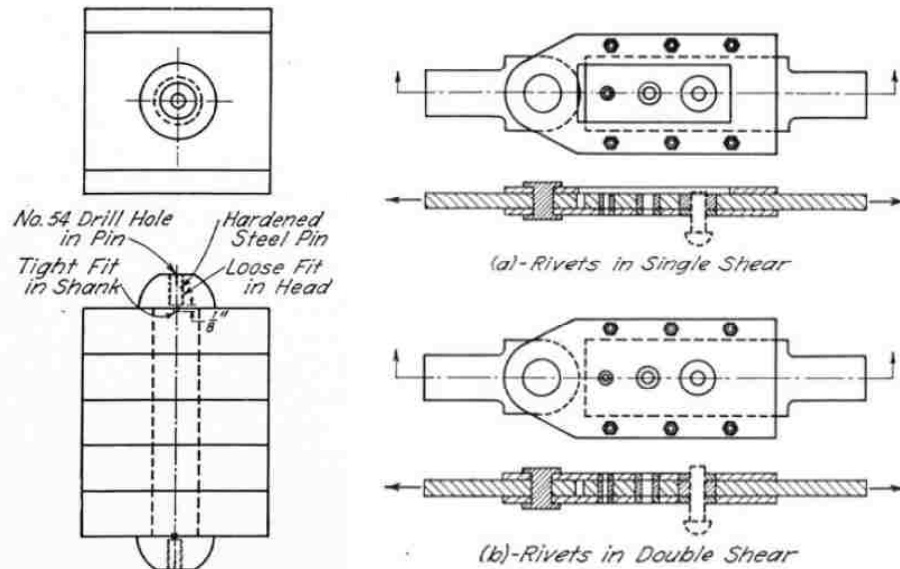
Prepared Rivet for Tension Test (left) Shear Test Apparatus for Un-driven-rivets (right) (Wilson, Bruckner, & McCrackin, 1942)
